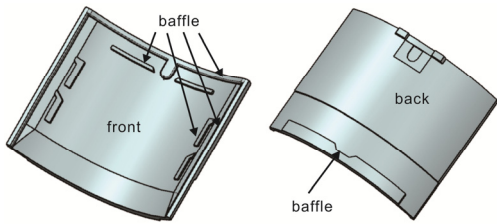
Arrangement of baffles in new Korean-style female roof tiles
